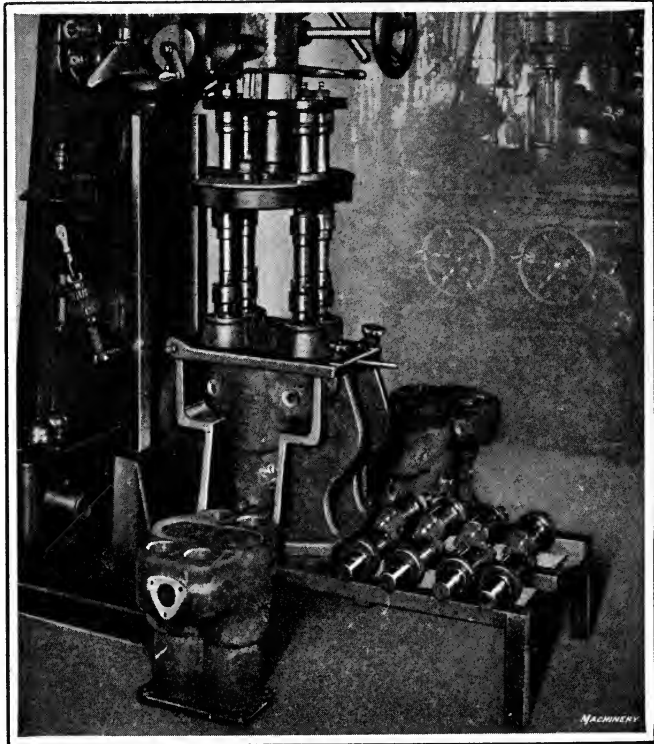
Four-spindle Auxiliary Drill Head for Machining Motor Cylinder Blocks
